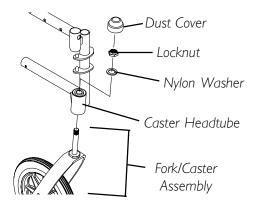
REMOVING THE FORK/CASTER ASSEMBLIES - WHEELCHAIRS UNDER 20-INCHES WIDE ONLY
